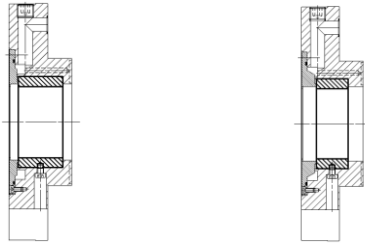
Original 0.6D bearing and modified 0.4D bearing
